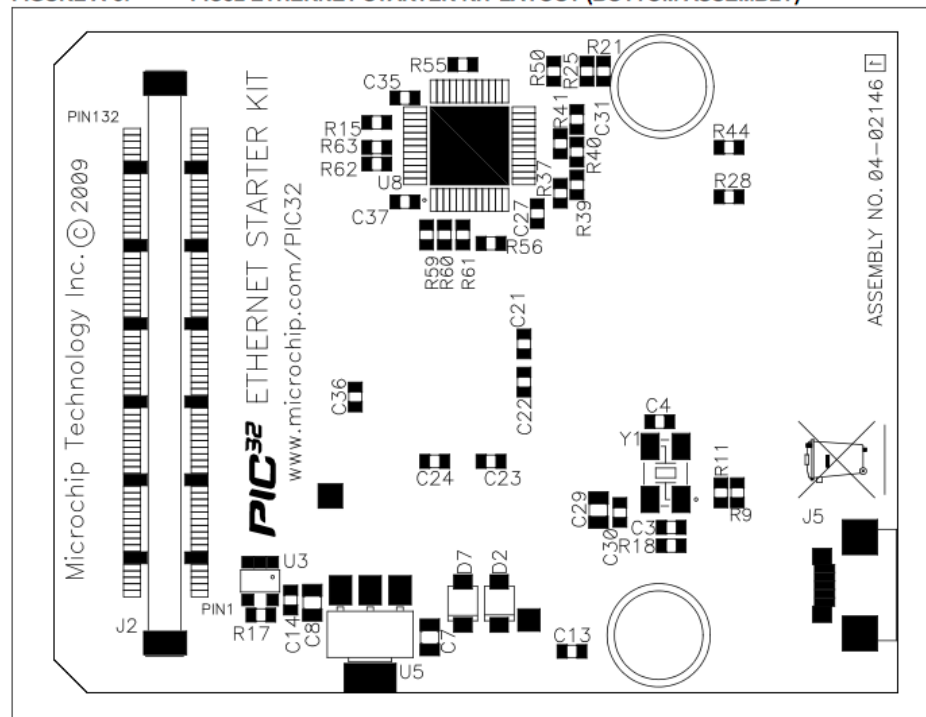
PIC32 ETHERNET STARTER KIT LAYOUT (BOTTOM ASSEMBLY)
